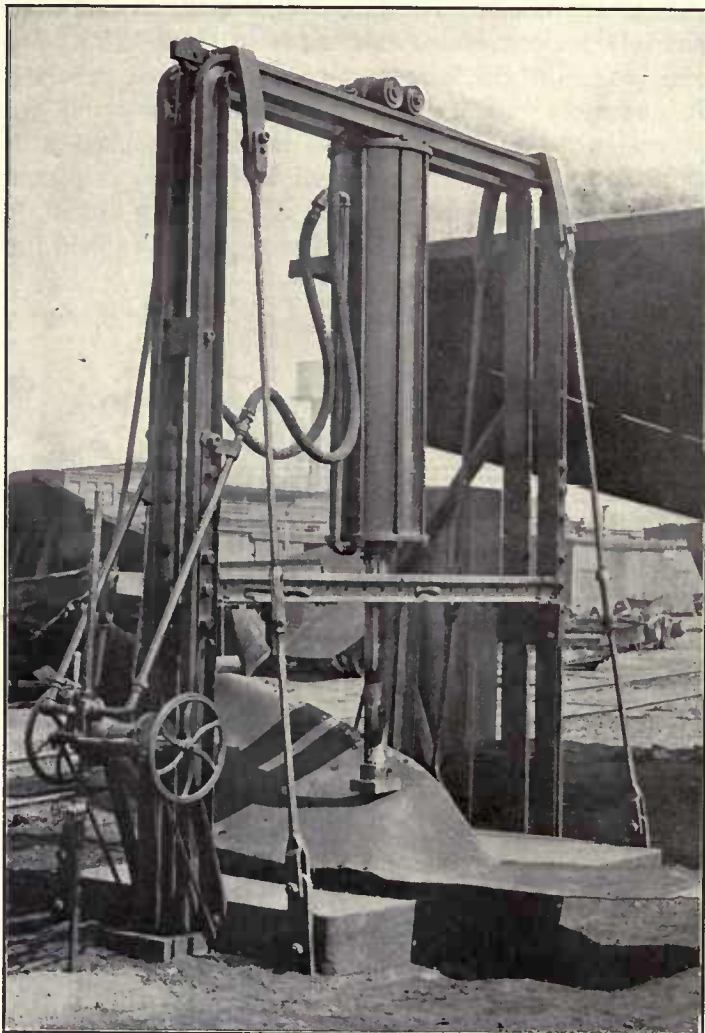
Air Press Straightening a Damaged Steel Plate.
